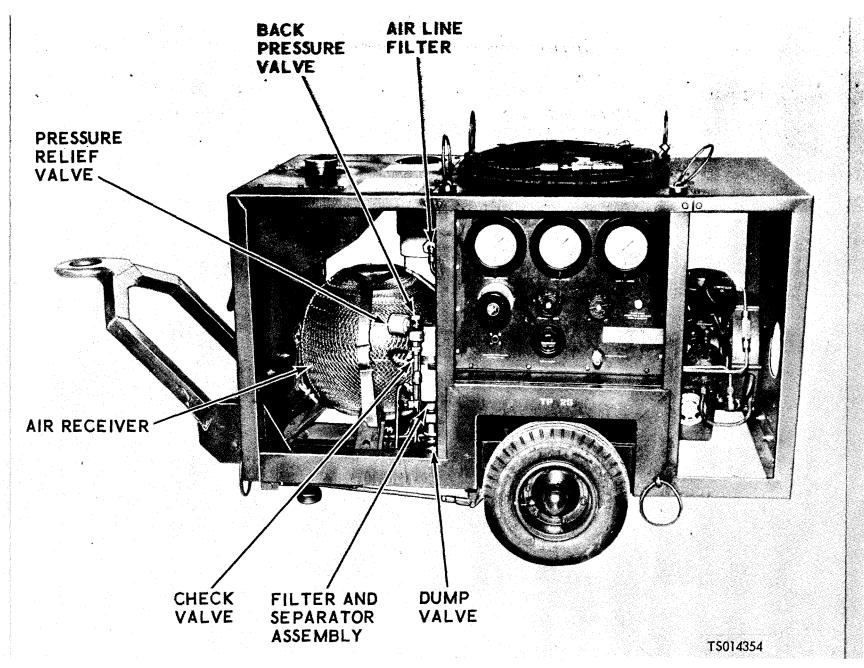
Compresser assembly components (sheet 1 of 2).
